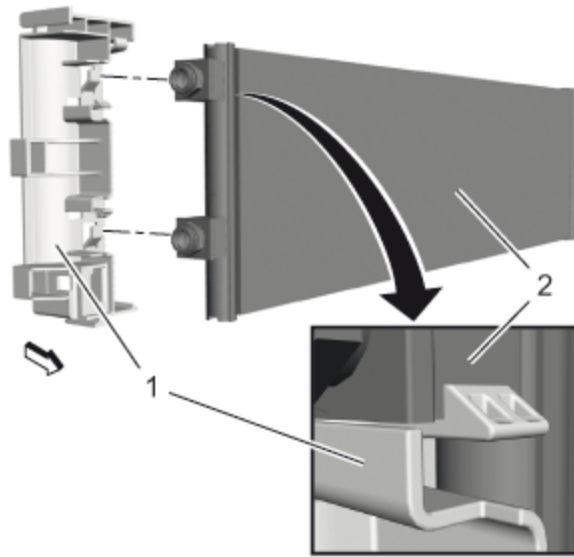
Transmission Fluid Auxiliary Cooler And Air Conditioning Condenser Bracket
